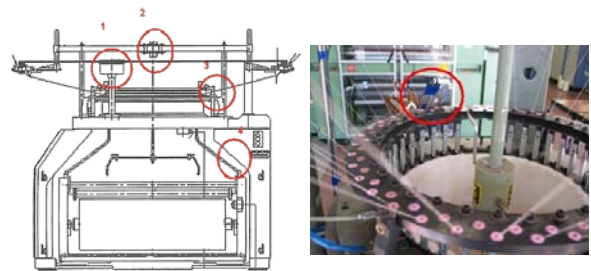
Sensors location on the knitting machine. Detail of the force sensor location.
